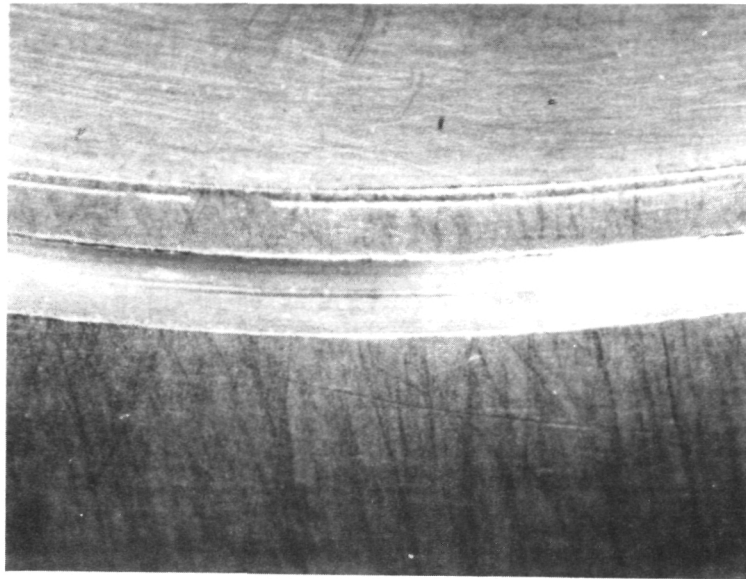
Fluidized Bed Test Cylinder — Chemically Milled Groove No. 2 and Machined Groove Detail
